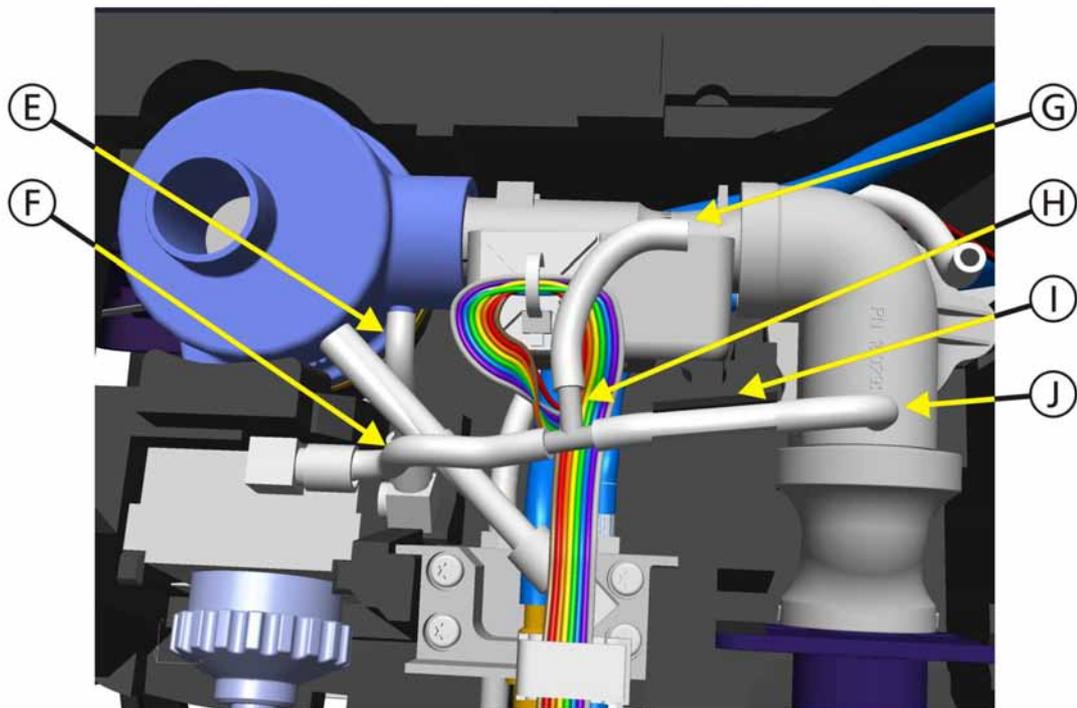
Oxygen Sensor Block and Tubing Assembly, Step 2
